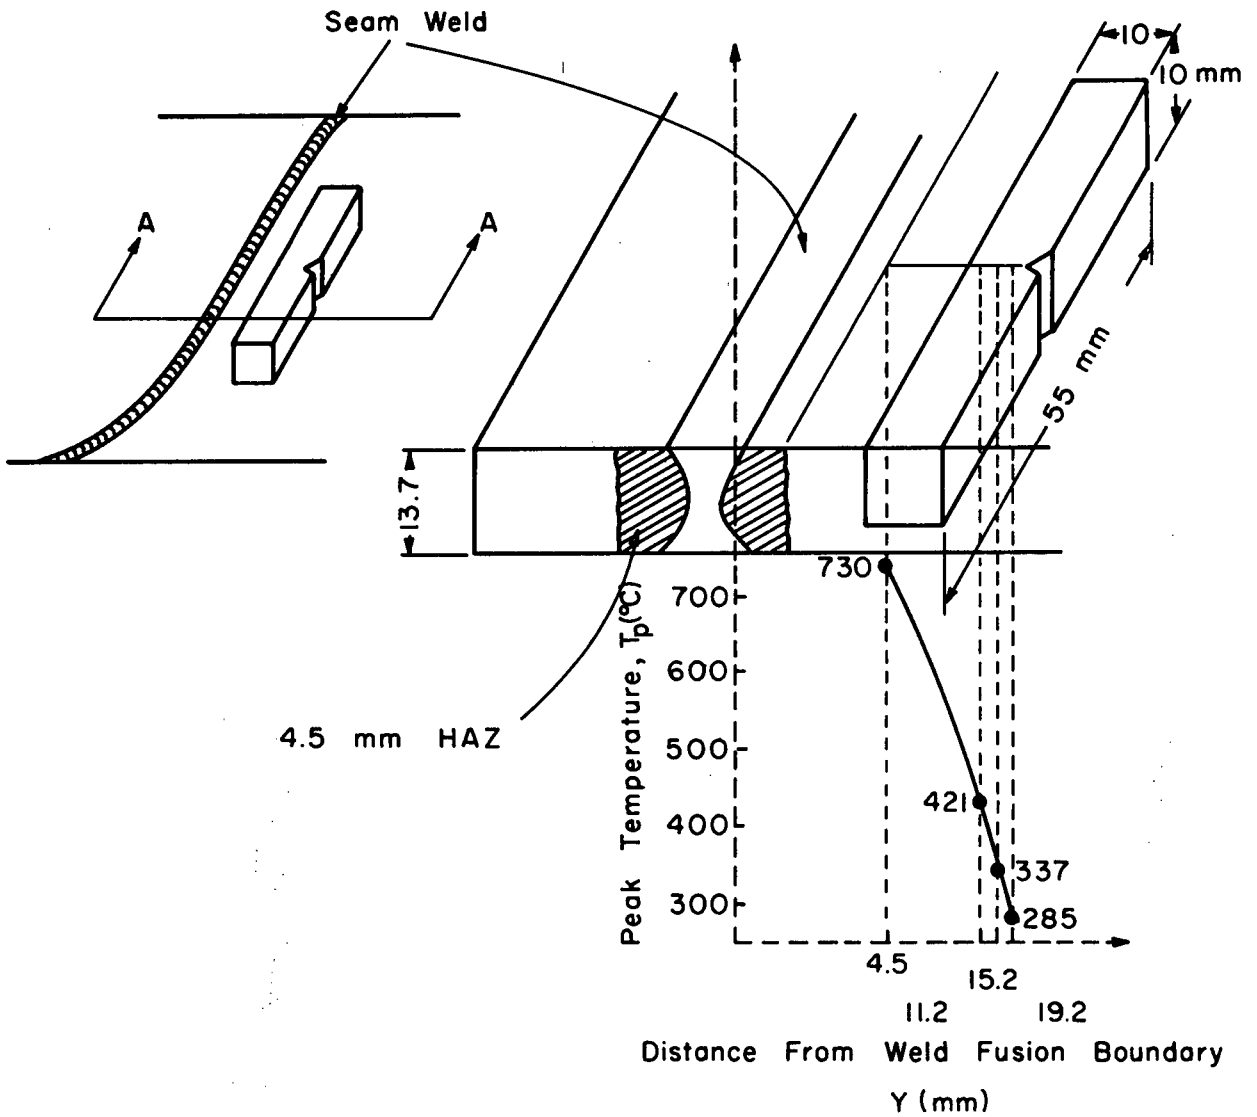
Temperature gradient in Charpy specimens from near seam weld.
